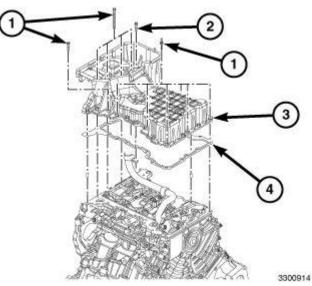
Upper Oil Pan, Oil Pump Pick-Up Tube, Gasket & Bolts Courtesy of CHRYSLER GROUP, LLC
